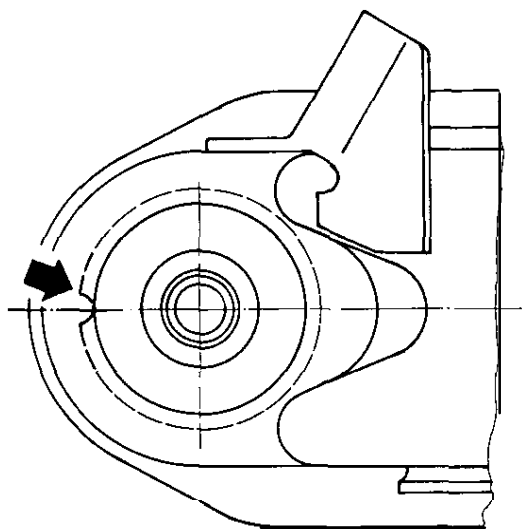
A-18 Lower Ball Joint Notch Opel 1900 . Manta
